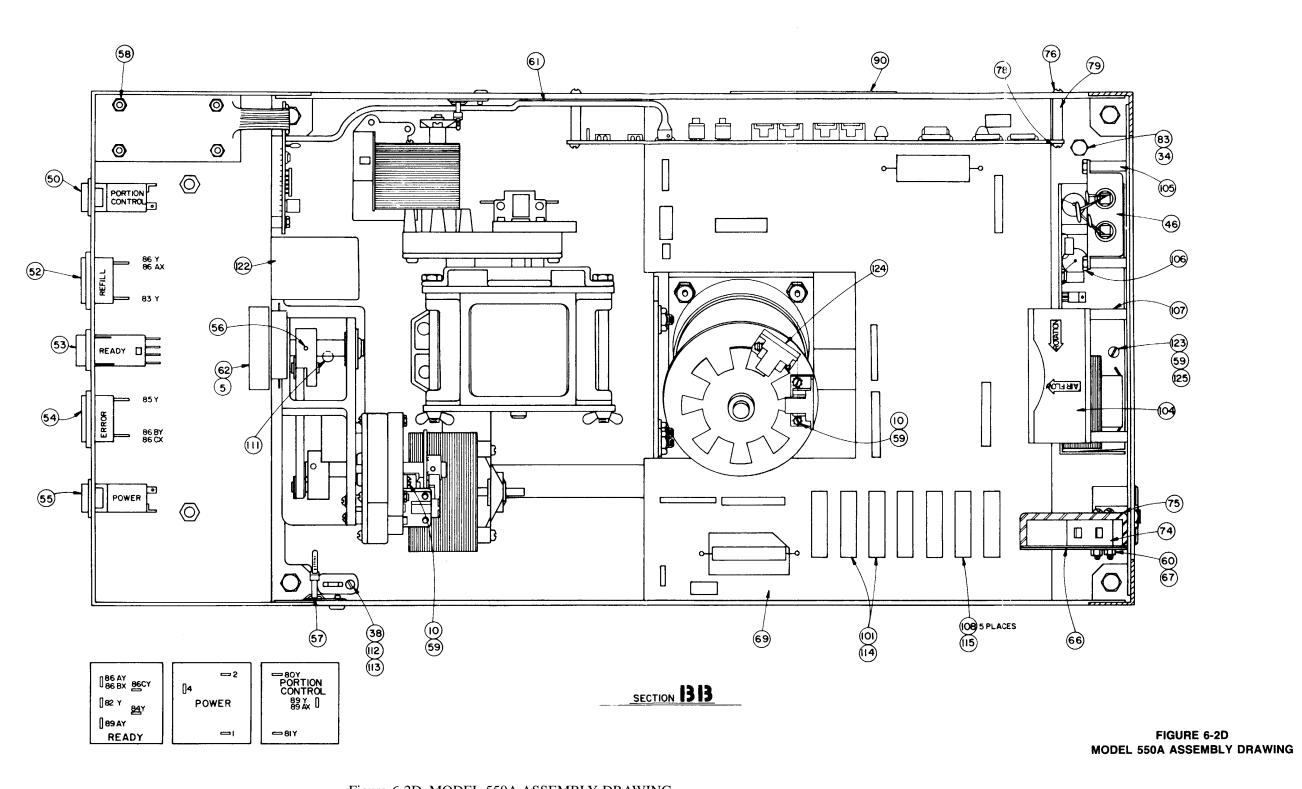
D MODEL 550A ASSEMBLY DRAWING
